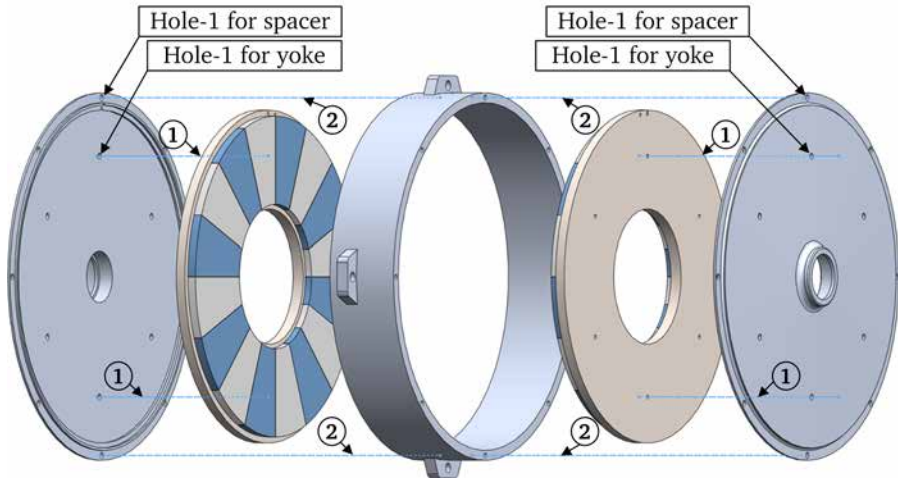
The exploded view of the rotor assembly of SAT PMBLDC motor. The rotor yoke and poles assembly will be screwed to the end cover along line-1, and the end covers will be screwed to the spacer along line-2.
